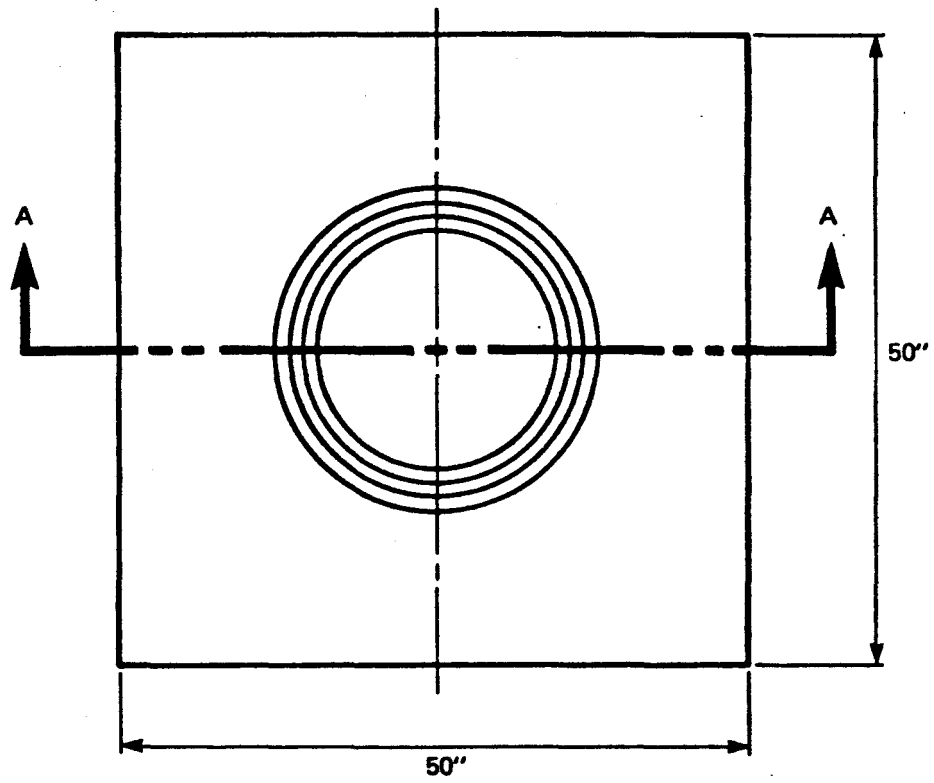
CIRCULAR PATCH SPECIMEN
